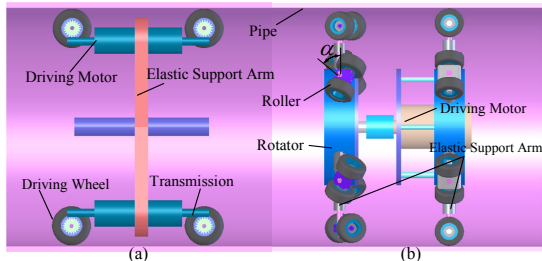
Wheel type pipe robot. (a) Direct drive wheel type robot. (b) Screw drive wheel type robot.
